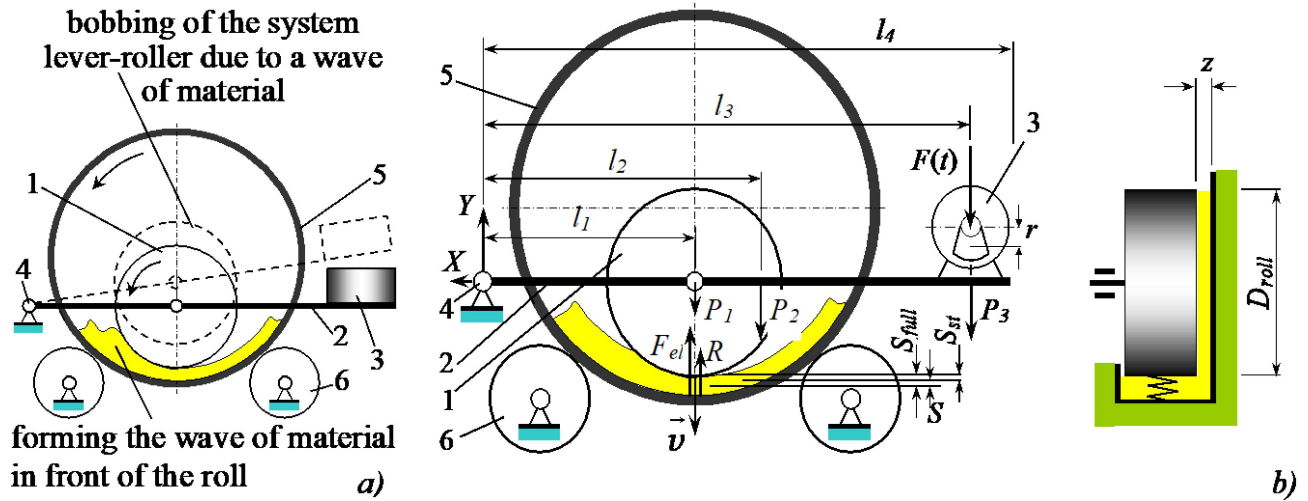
Scheme of drum-roll machine: a) forming the wave of material in front of the roll; б) construction with forced vibration of the "lever-roller"
